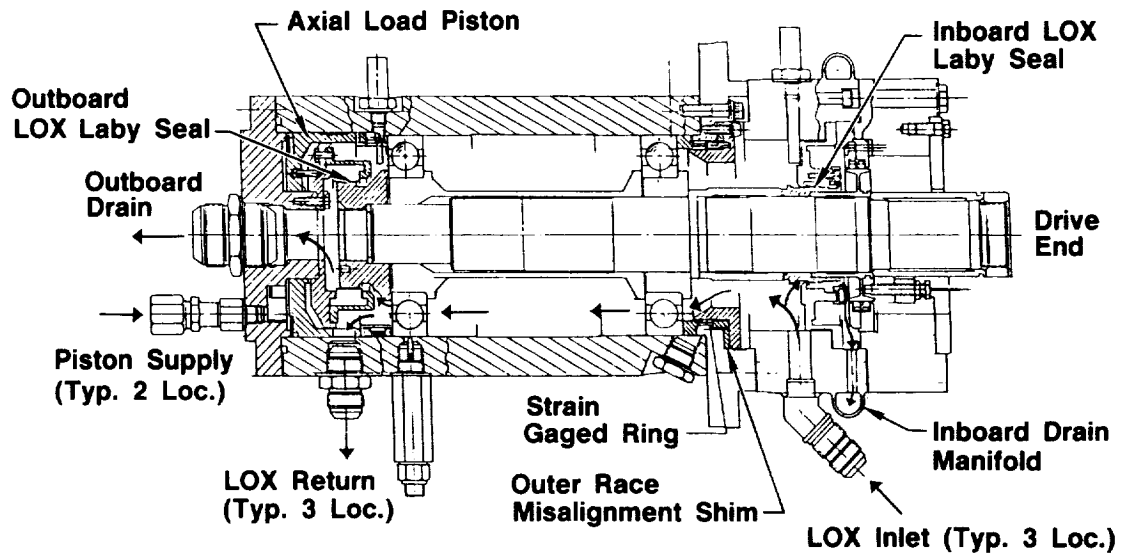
SSME Low Pressure LOX Thrust Bearing Tester
